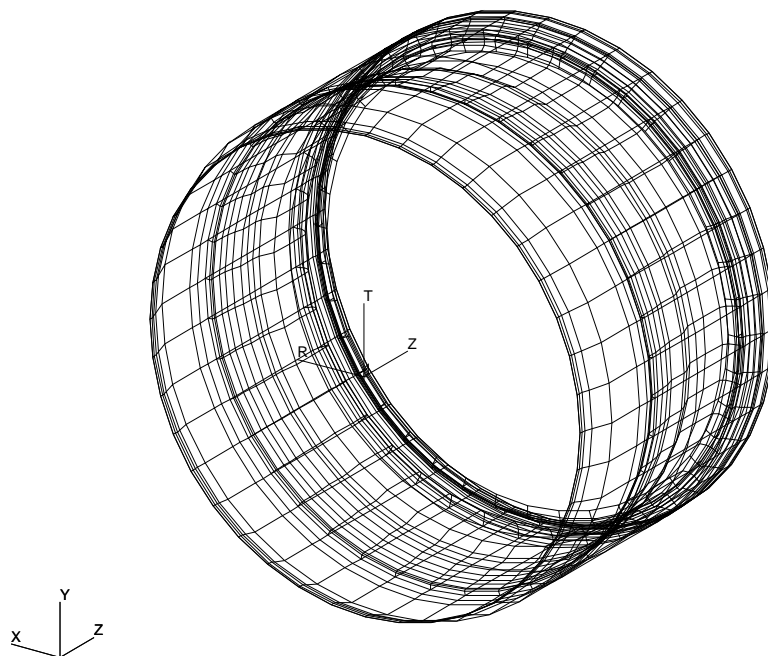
Combustor Casing Reduced Beam/Shell 3-D Model
